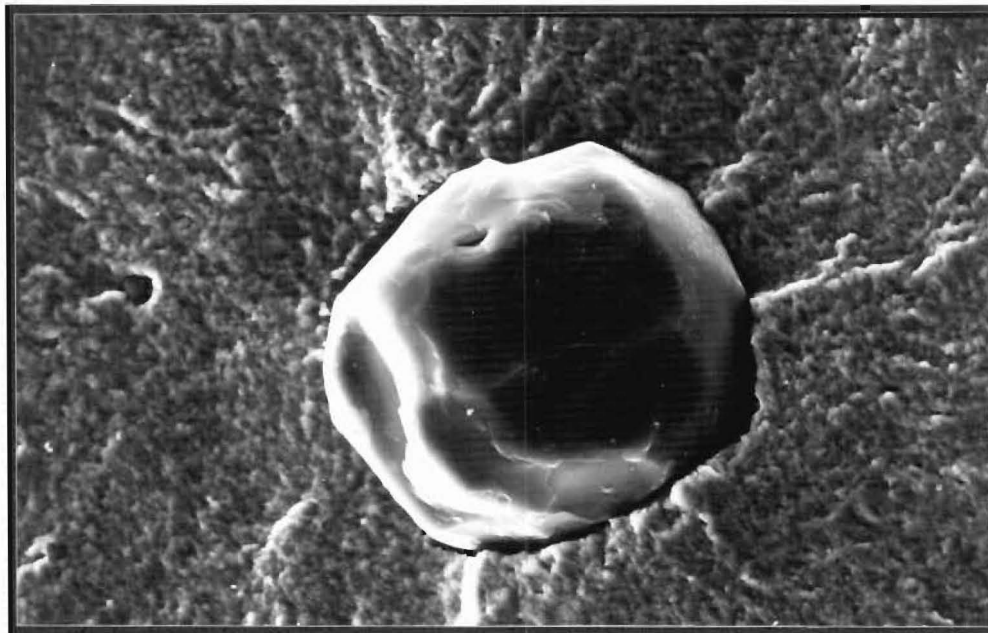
an undamaged inclusion which initiated fatigue crack in 11A. $10\mu\text{m}$
